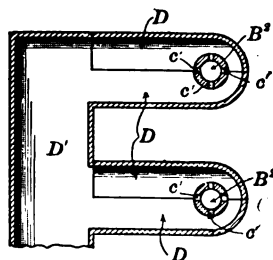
ROTARY BLOWER FOR HOT GAS.
